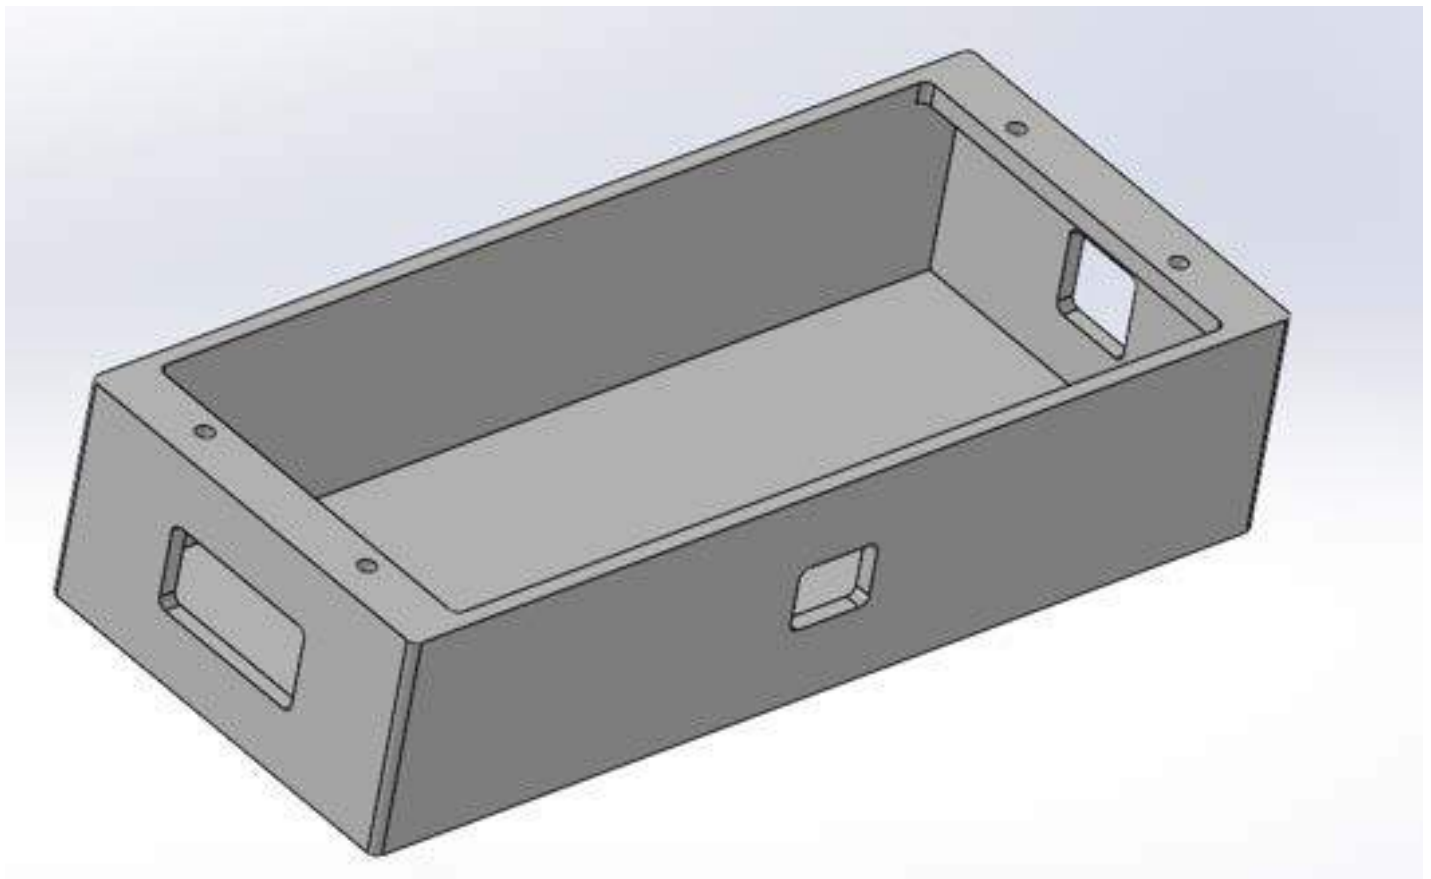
Electronics Box. The electronics box will include the Arduino Mega and the motor controller. It has holes on the front and back walls for wires to be thread in and out of. There is also a side hole to allow for easy access to the power supply cord. This box will sit flat on the ground near the rower base.
